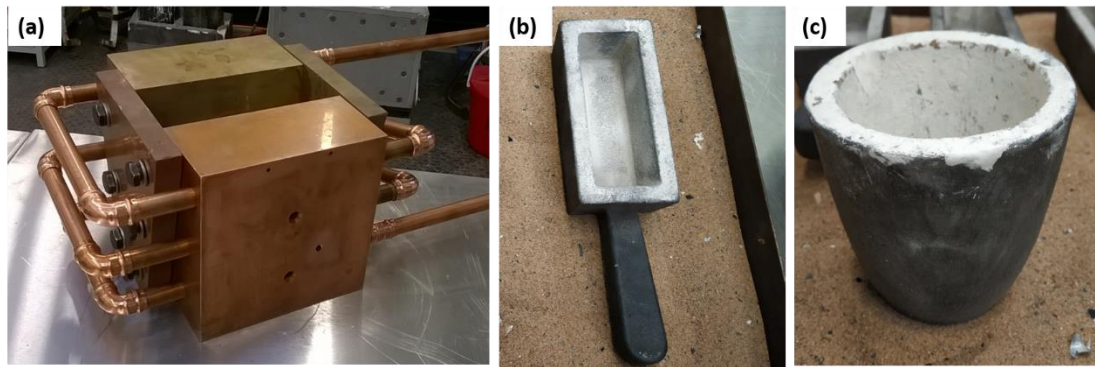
Mould for casting (a) water cooled wedge copper mould, (b) cast iron mould (c) clay graphite crucible mould.
